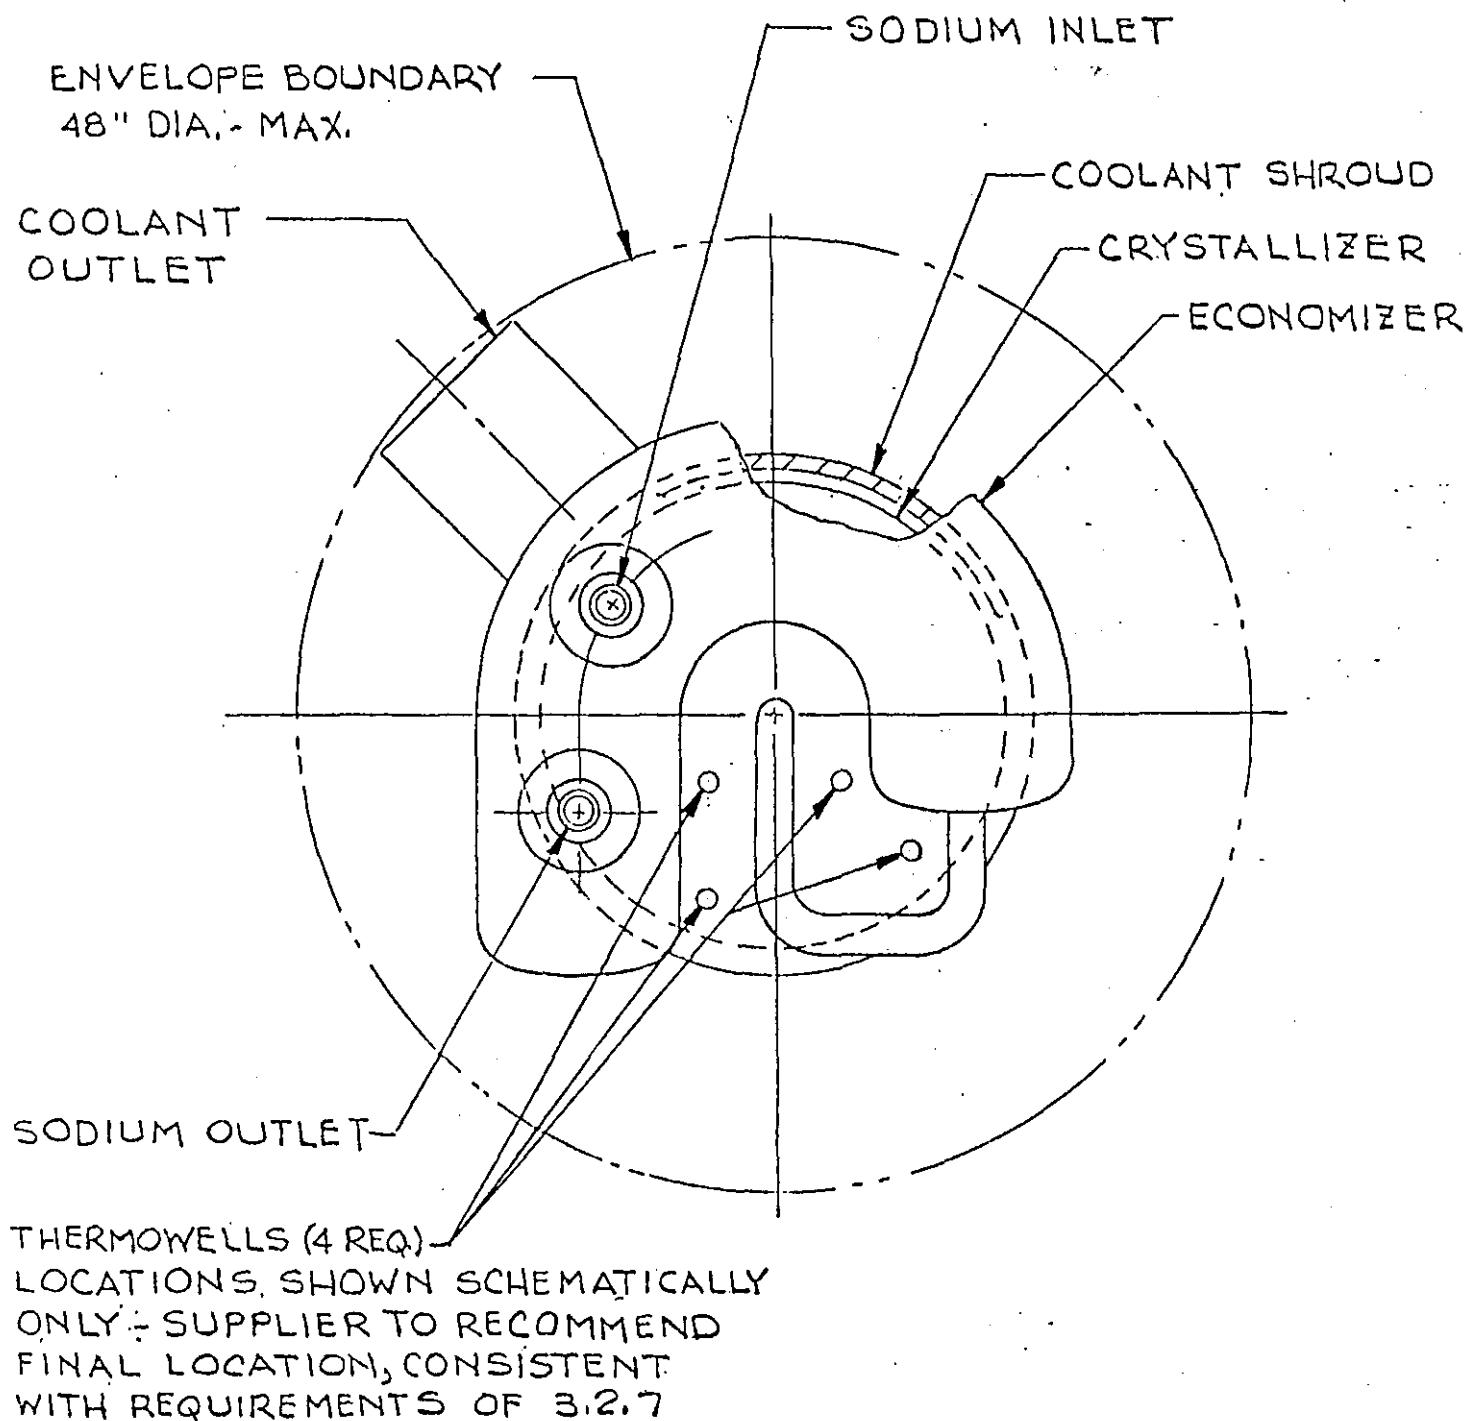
PLAN-COLD TRAP ASSEMBLY
